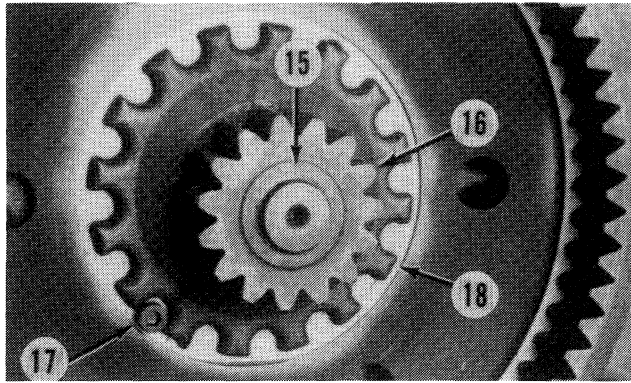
View of planetary sun gear and ring gear hub retainer.
